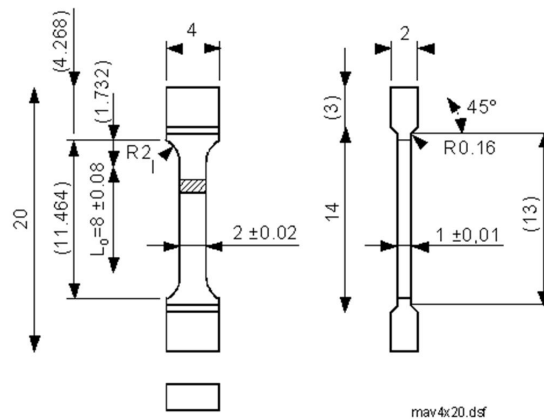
Technical drawing of the flat-bar tensile testing specimen.
